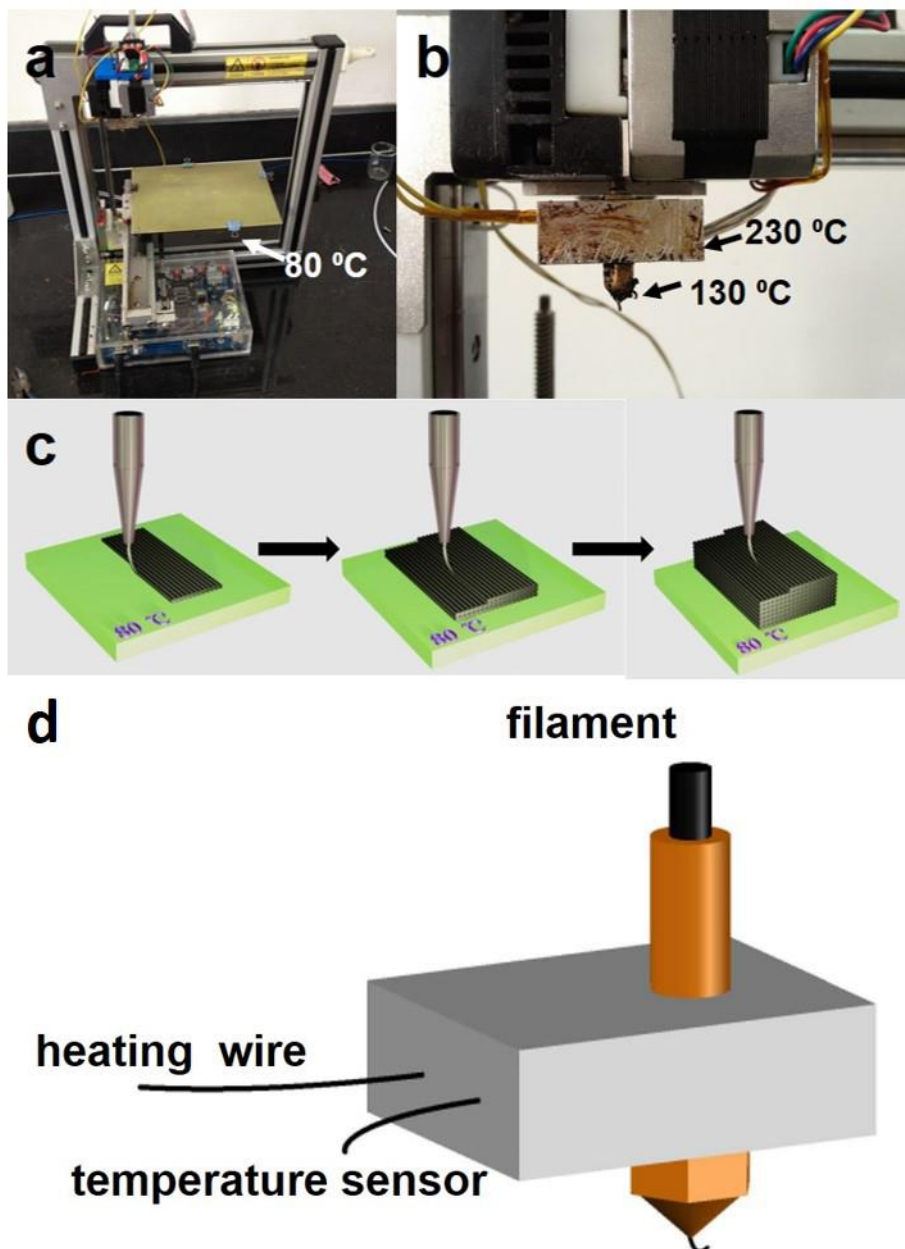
Optical images of the 3D printer (a) and nozzle (b). 3D printing nozzle moved back and forth at rate ~ 20 mm/s. Scheme illustration of layer by layer manufacturing technique (c) and HBC (d).
